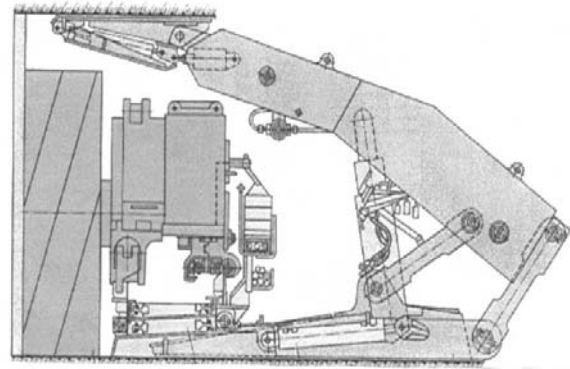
Perspective of an adit equipped with a mechanized complex 2OKP-70 type and a KŞ-3M shearer
